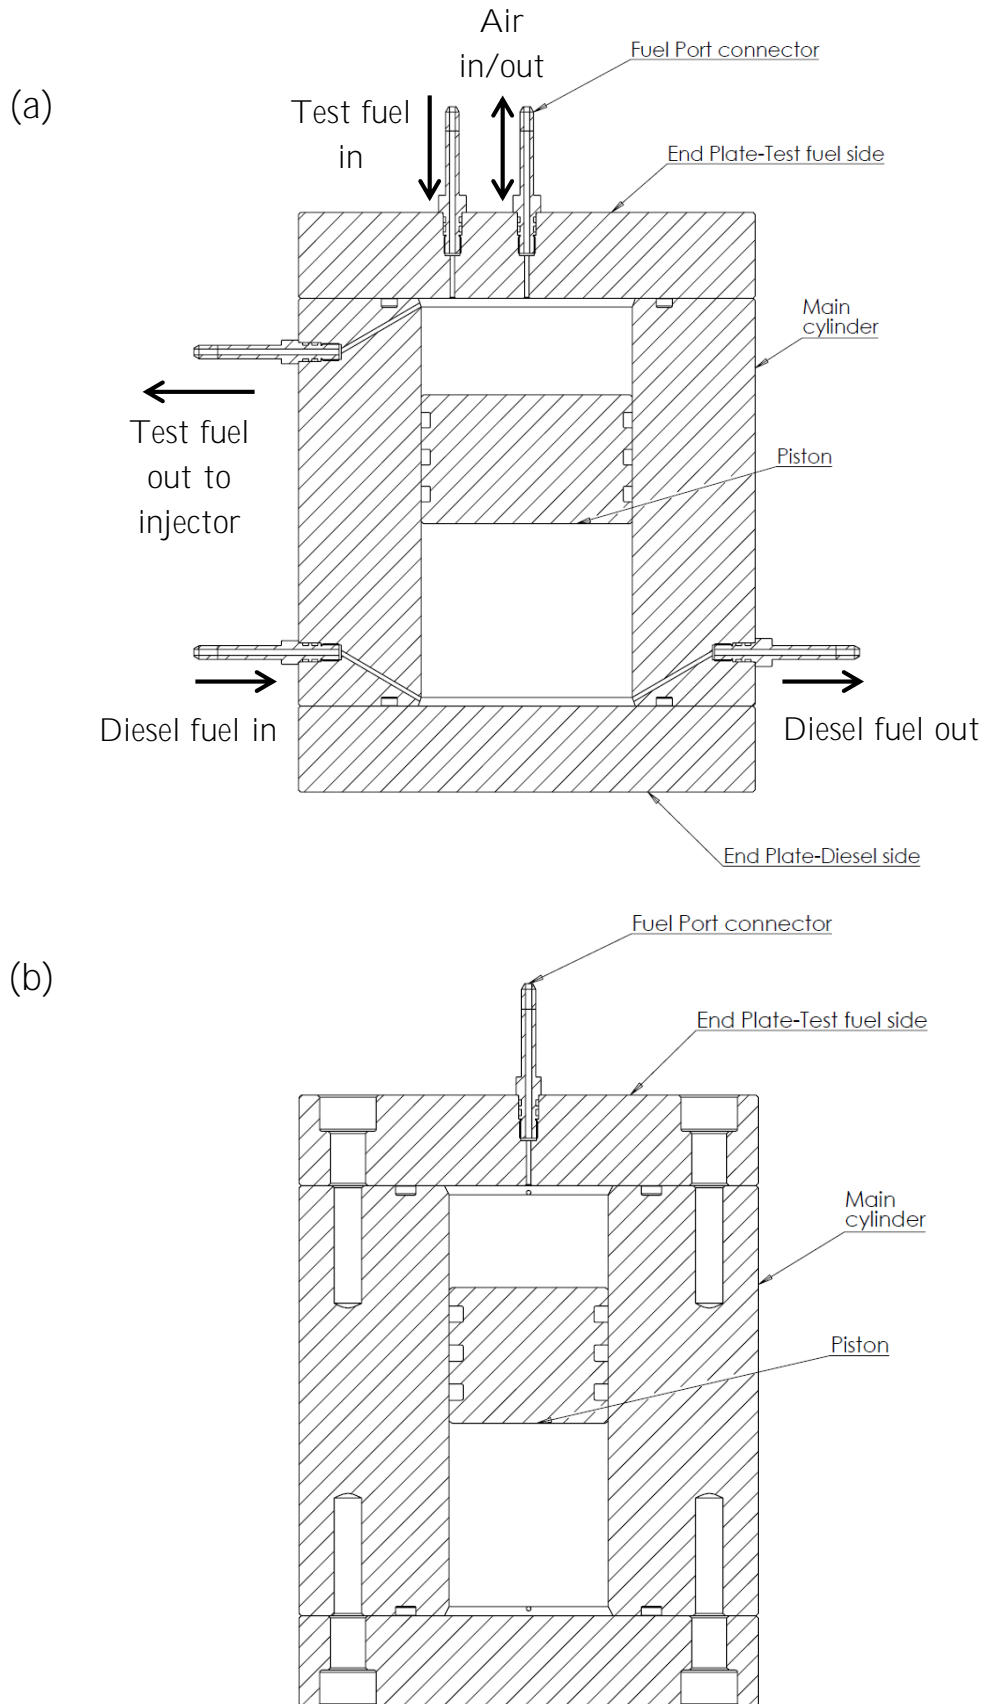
Cross-sectional (a) front view and (b) side view of the assembly of the high pressure fuel system
